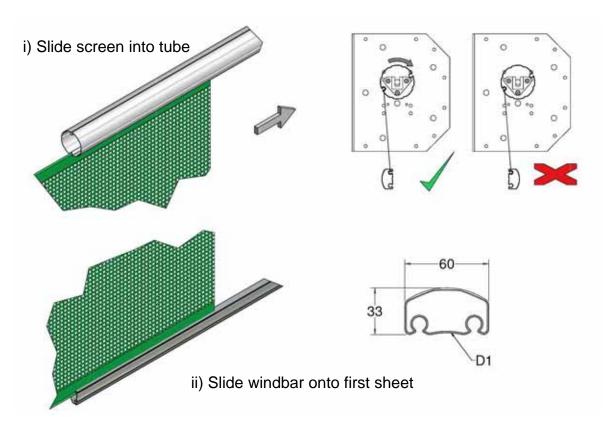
, Sliding Fabric Panels and Windbars onto Top Tube
